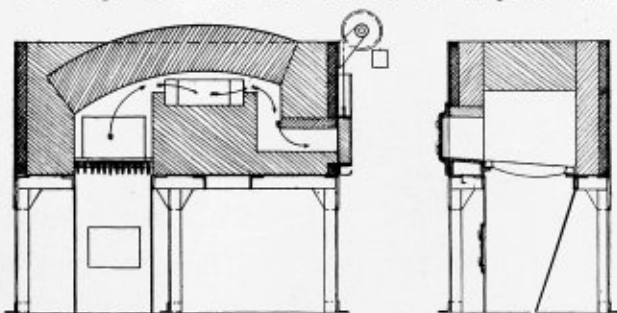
HEATING FURNACE IN WHICH THE FLAMES DO NOT STRIKE THE RIVETS.
